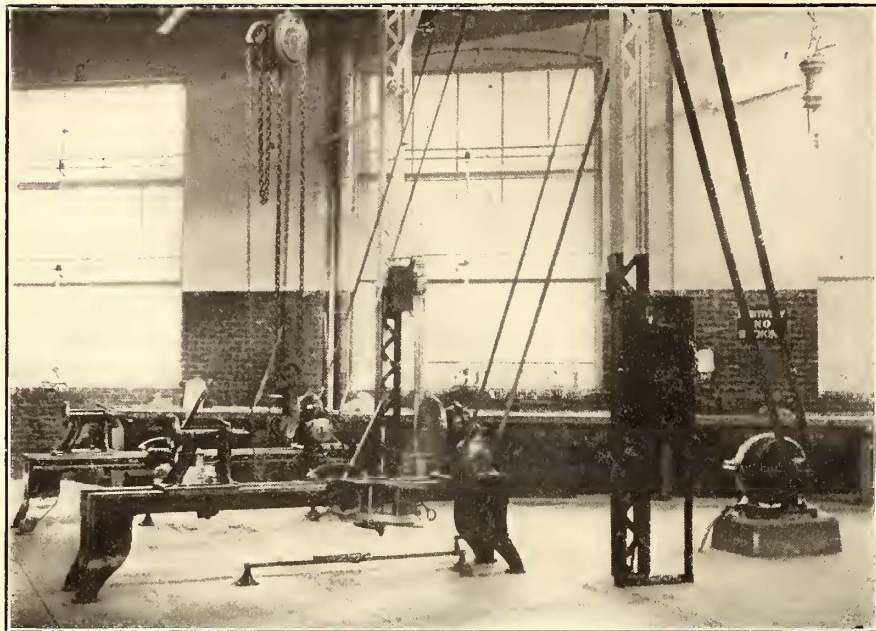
ARMATURE-BANDING LATHES AND BELTED MOTOR DRIVE
